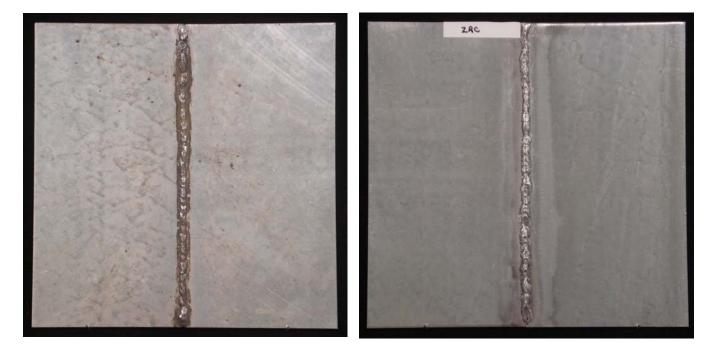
Showing a representative test piece after MIG welding. Figure 4 Showing ZRC test piece after surface preparation. Two coats of ZRC were applied from a randomly chosen can (after stirring) by brush to a total dry film thickness of 4.3 mils (recorded with a Positector 6000 series magnetic film thickness gauge, per SSPC-PA 2), allowing a 24-hour dry time at 25°C between coats. ZRC was overlapped 1.5 inches over the galvanized surface on either side of the weld. Figure 5 shows the panel after ZRC application.
